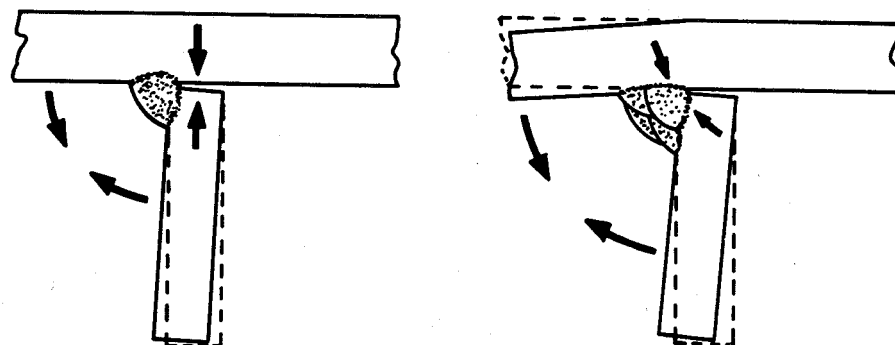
ANGULAR ROTATION OF FILLET WELD
